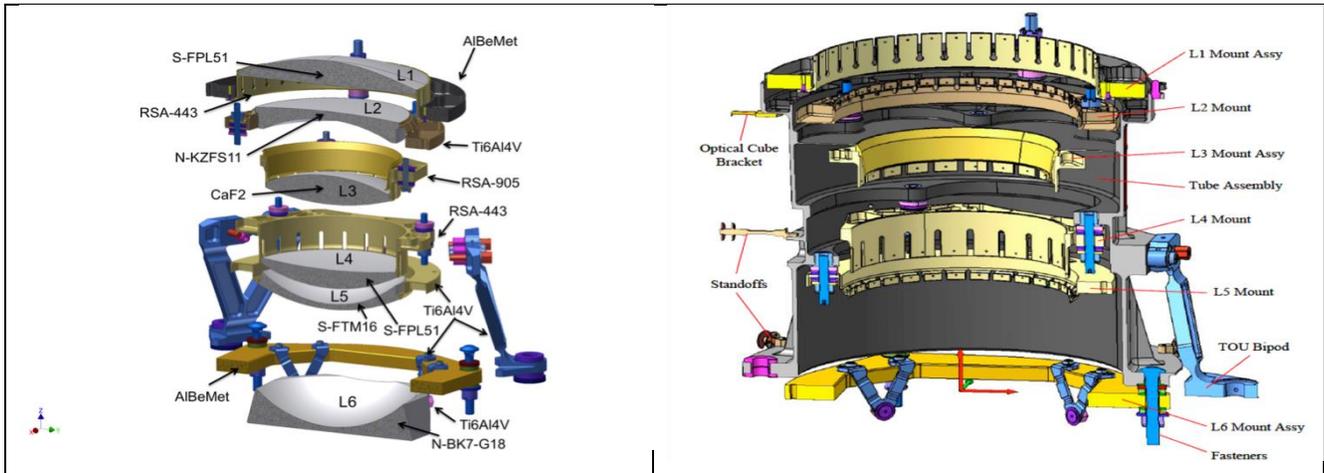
Left*: an exploded view of a PLATO’s TOU with a focus on the materials used for the glasses, their mounts, and for the interface components. *Right*: Details of the mechanical structure with subcomponents highlighted.
